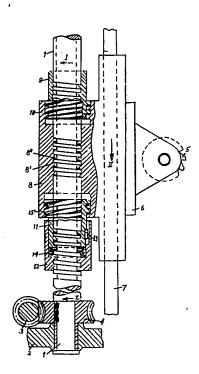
Mechanism for Eliminating Gap between Nut and Lifting Screw
